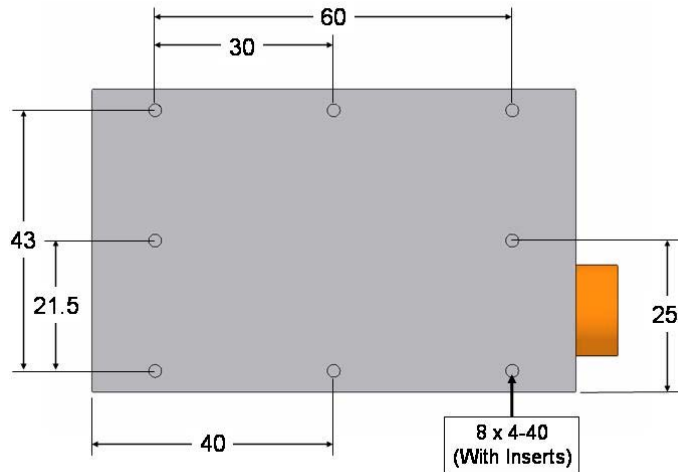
Spectrometer Mounting-hole Locations (ANSI/ASME 4-40 threads). Mounting hardware should not extend more than 5.0mm into threads. Do not over torque.
